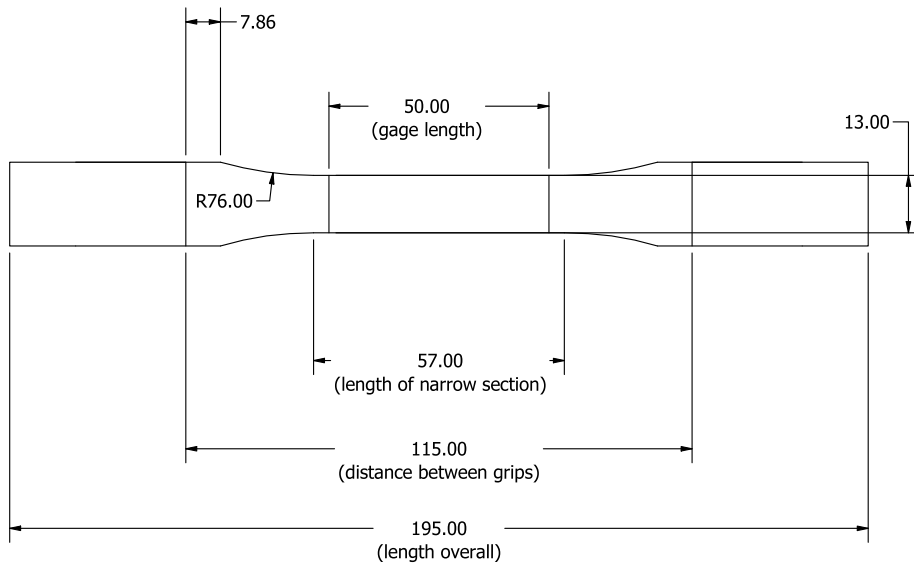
Polycarbonate coupon dimensions (in mm) [6].
